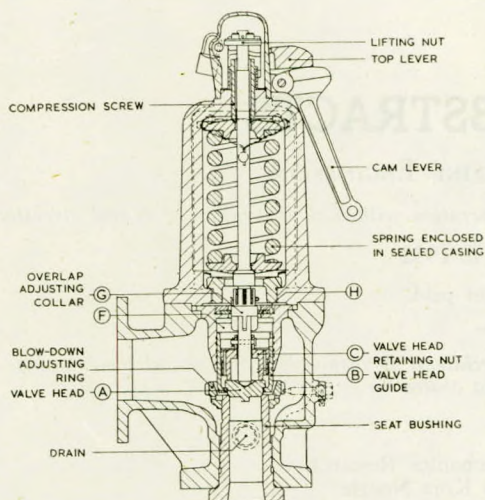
Sectional elevation of Dewrance-Consolidated steam safety valve
